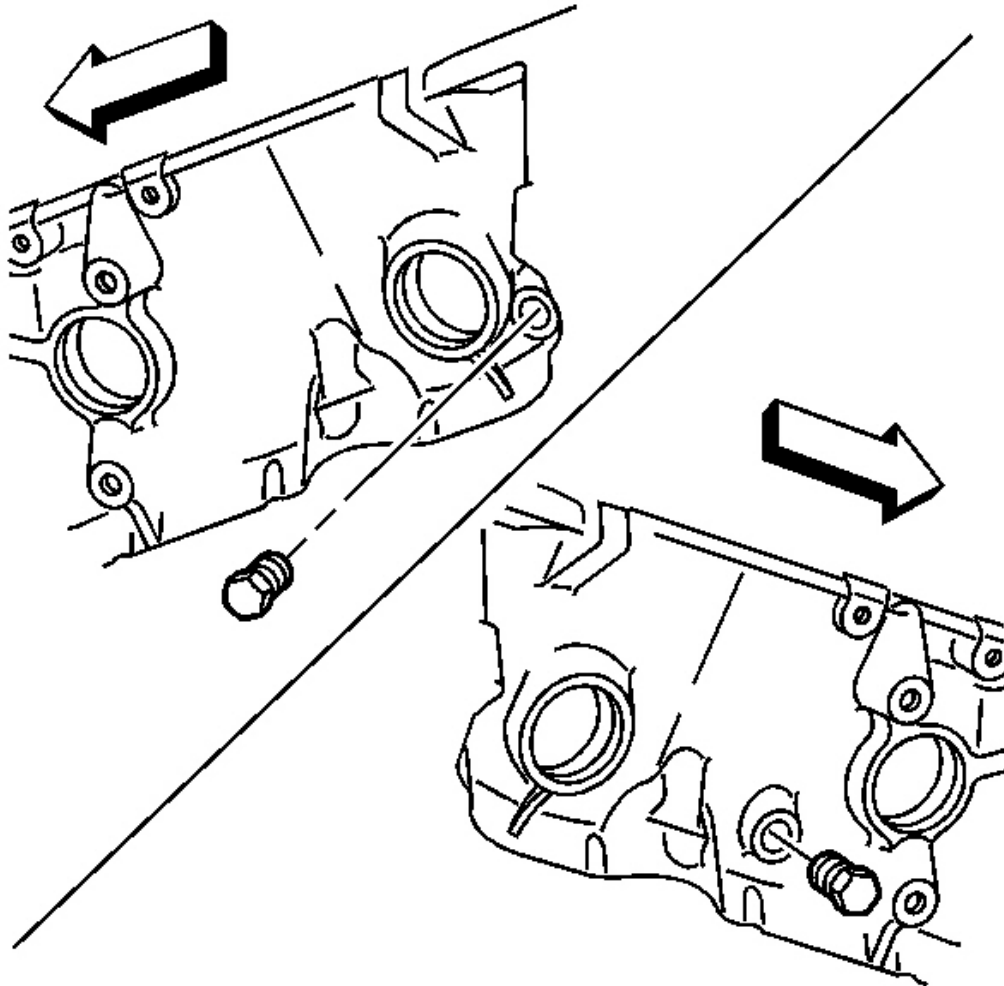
View Of Engine Block Coolant Drain Hole Plugs
